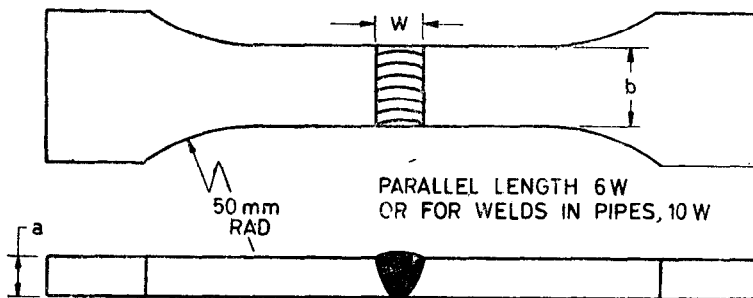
REDUCED TRANSVERSE TENSILE TEST SPECIMEN
